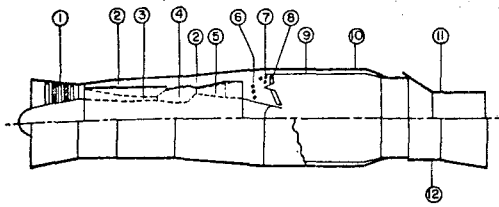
Pratt and Whitney F100-PW-100 augmented turbofan engine. (1) Three stage fan; (2) bypass air duct; core engine compressor (3), burner (4), and turbine (5); (6) fuel injectors for core engine gas stream; (7) fuel injectors for bypass air stream; (8) flame stabilizer for afterburner; (9) perforated afterburner liner; (10) afterburner case; nozzle closed to minimum area (11) and opened to maximum area (12).
